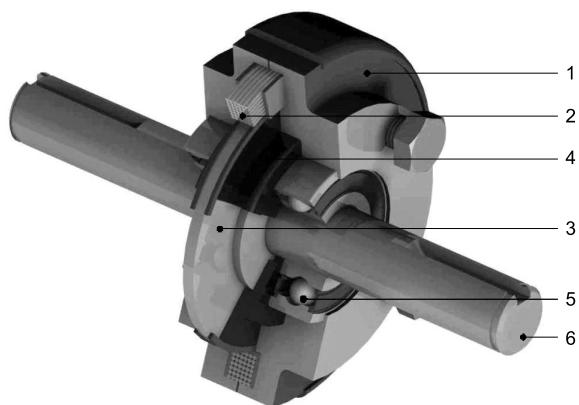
Structure of the MR 2107-3 damper: 1 – housing, 2 – coil, 3 – disk, 4 – MR fluid, 5 – bearing, 6 – shaft
